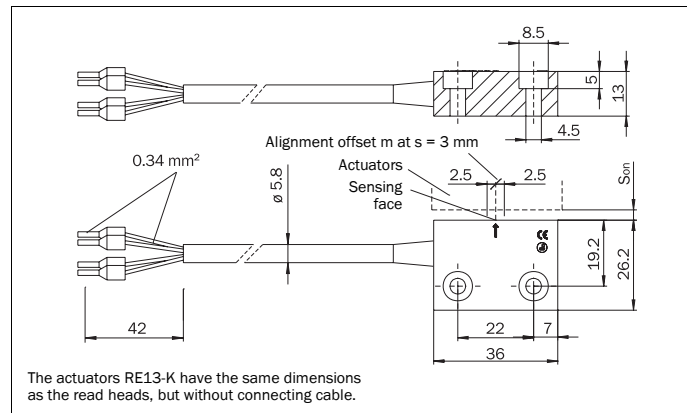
Dimensional drawing RE13-DA.. magnetic safety switch
